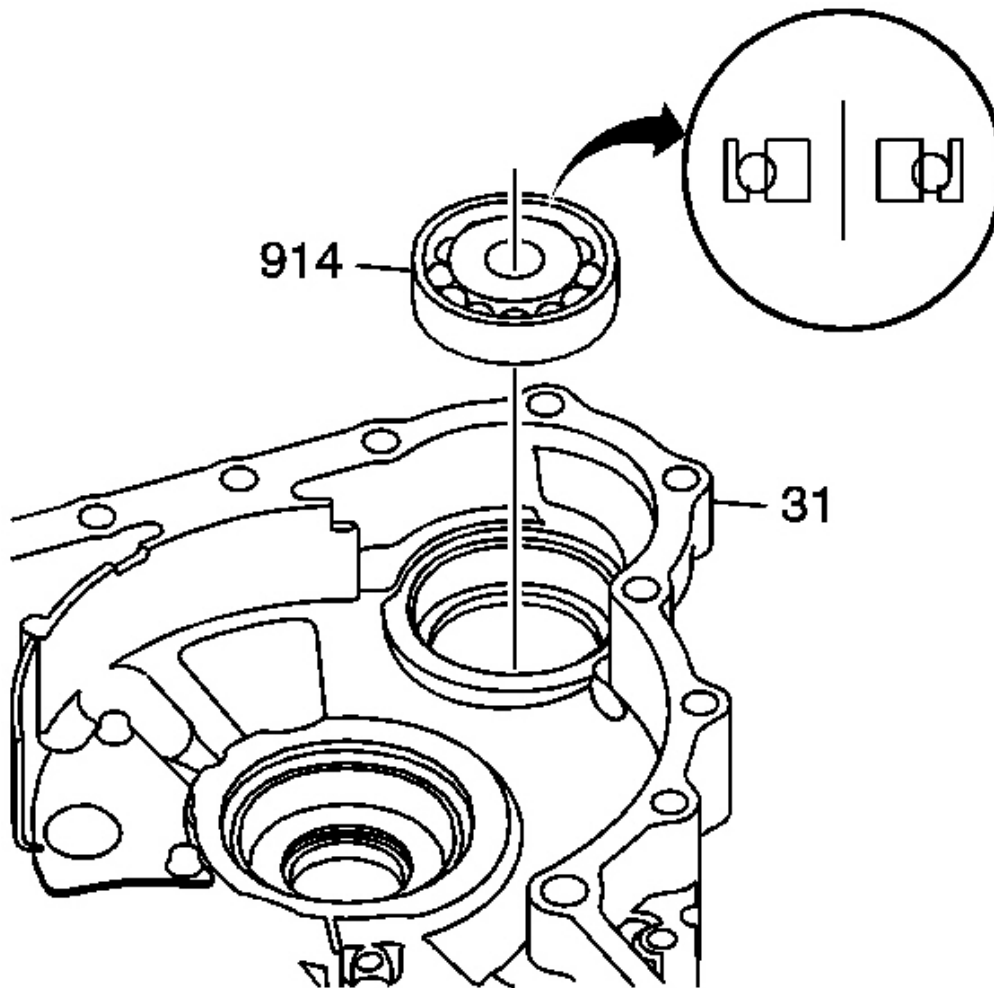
Transfer Case Input Gear Bearing & Transmission Case
